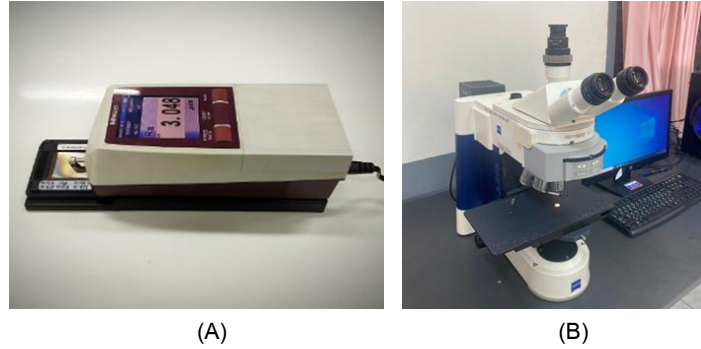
Equipment for workpiece quality measurement: (A) a surface roughness tester and (B) a microscope
